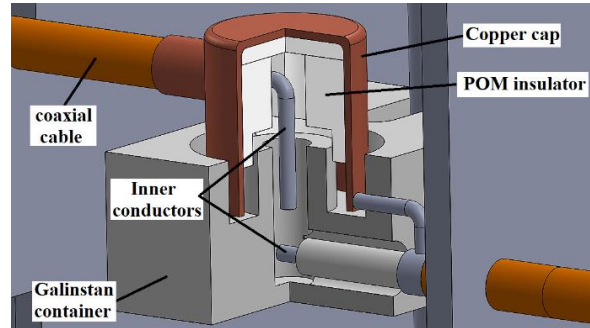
Single electrical feedthrough. Sectional view of the Galinstan container and coaxial contacts.
